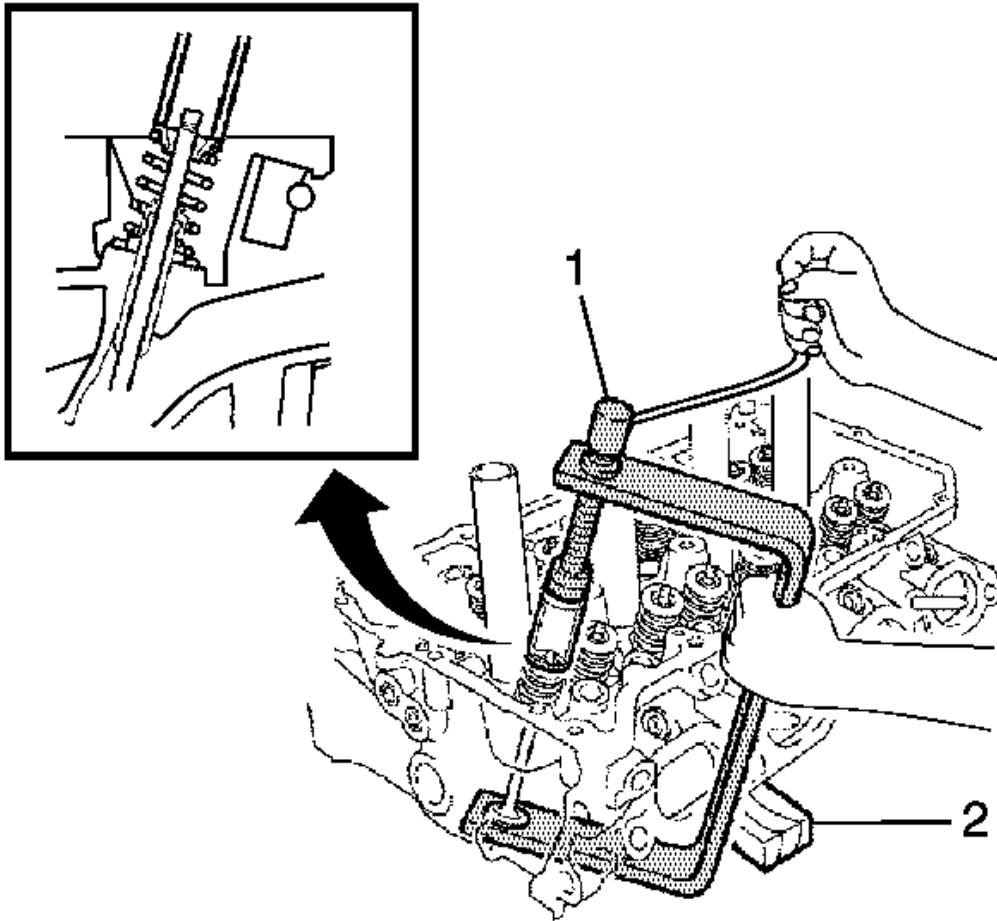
View Of Compressing Valve Spring & Removing/Installing Valve Retainer Locks
